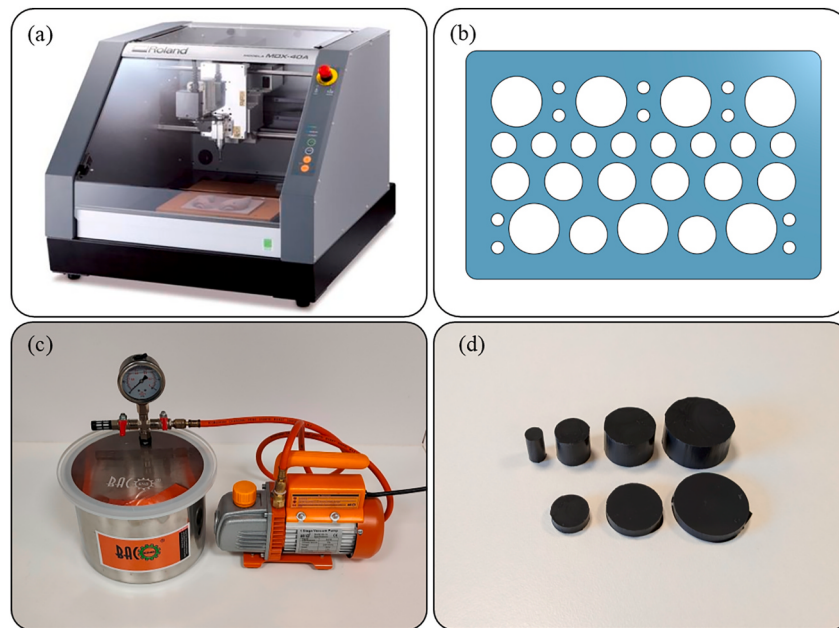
Equipment and materials used for the preparation of particle-reinforced elastomer samples: (a) ROLAND MDX-40A 3D milling machine; (b) cylindrical mold made of PMMA; (c) vacuum chamber and pump and (d) composite samples of various sizes.
